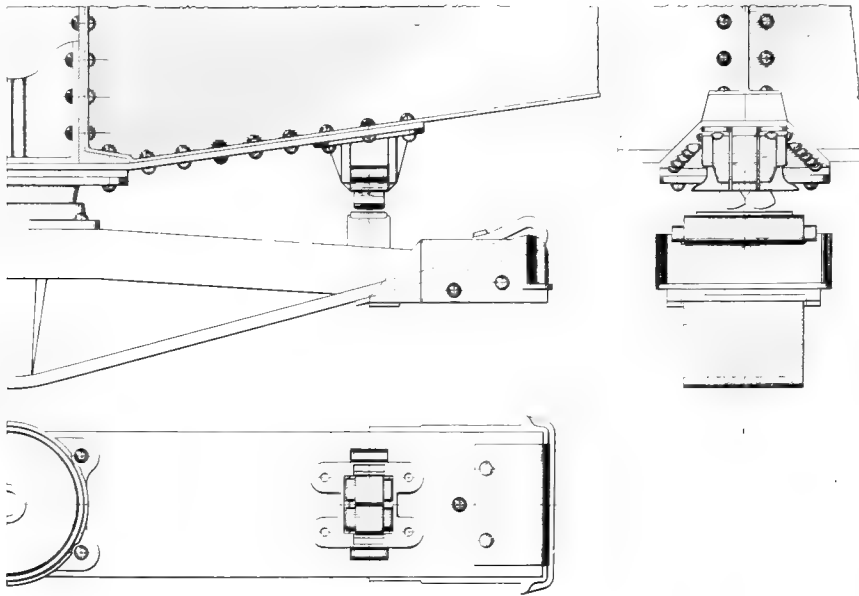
Tip Roller Side Bearing Applied to 50-Ton Capacity Freight Car. Edwin S. Woods & Company.
